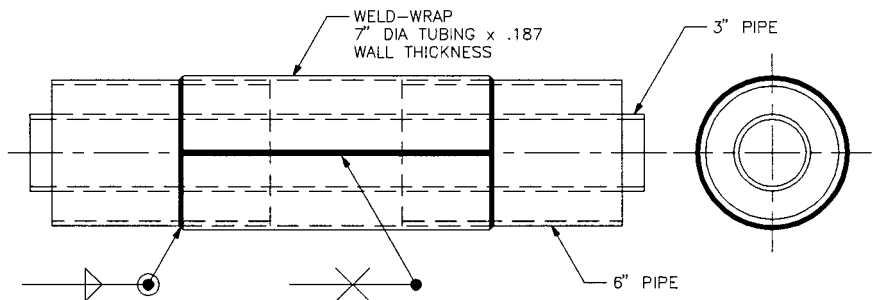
Cross-sectional view of a weld-wrap assembly.
